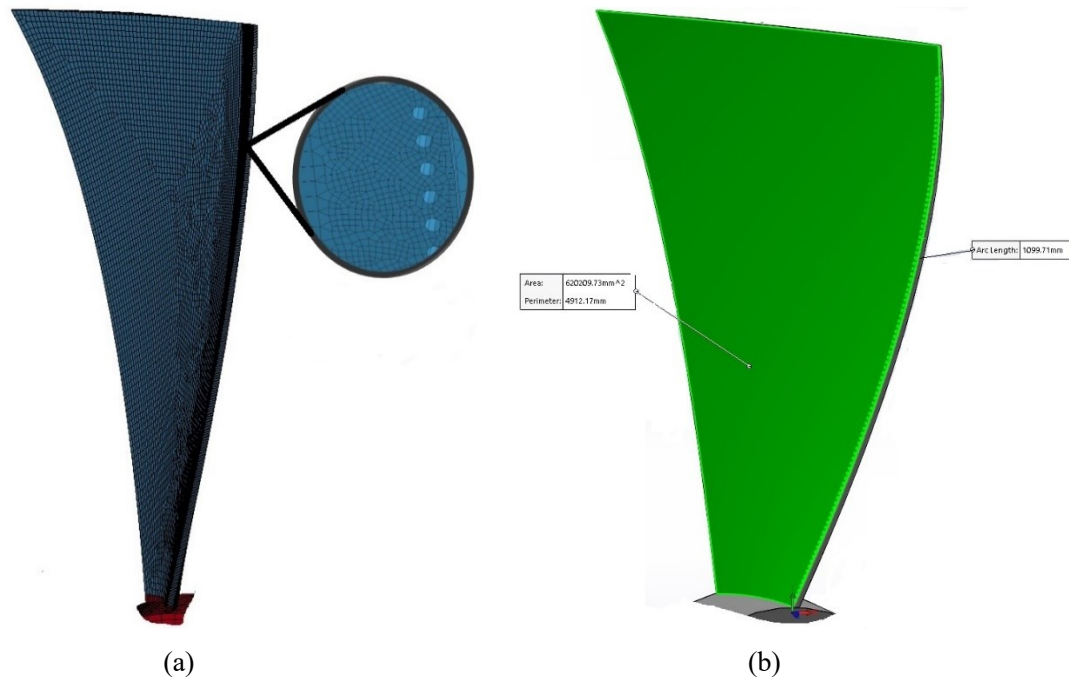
(a) Blade mesh assembly, (b) Blade geometry.
